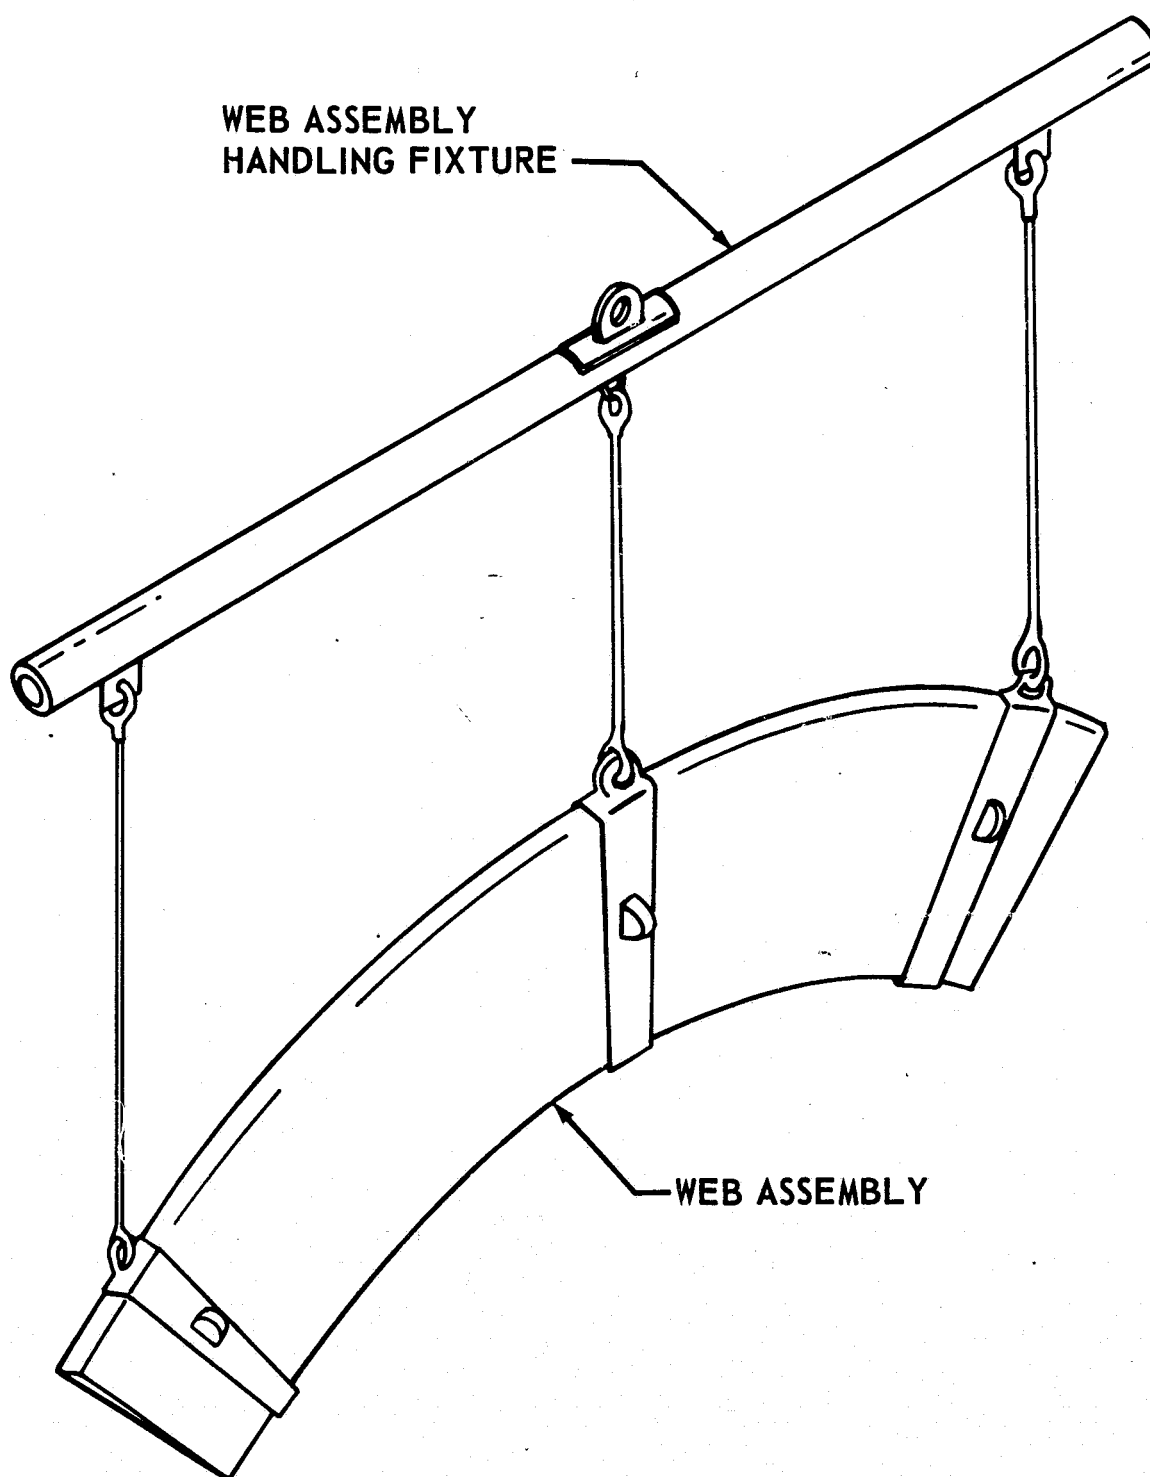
RING FRAME WEB ASSEMBLY HANDLING FIXTURE
